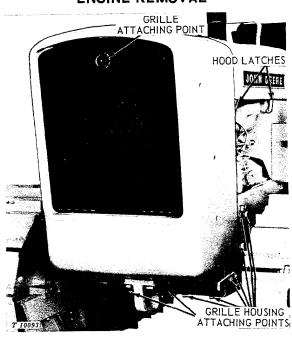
Hood and Grille Housing Attaching Points
